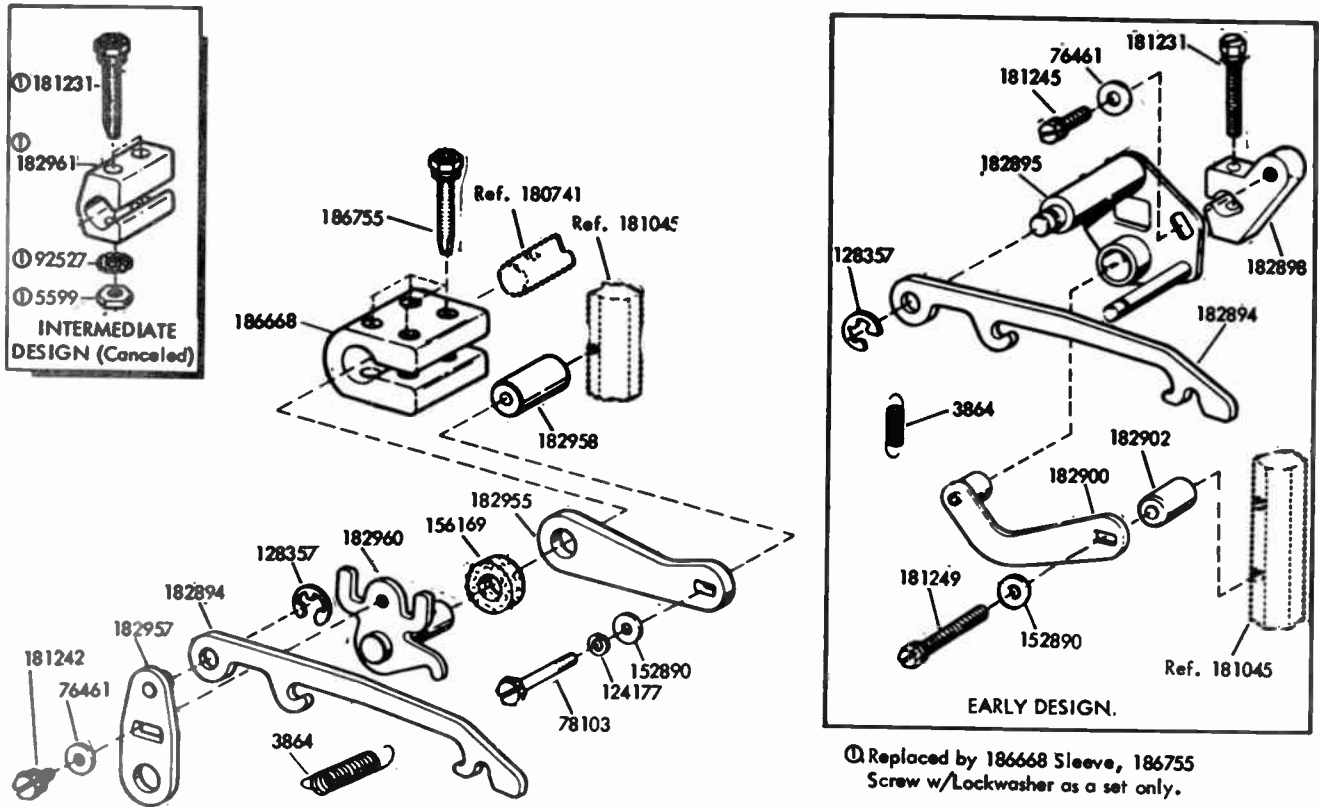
182964 DRIVE ARM ASSEMBLY
